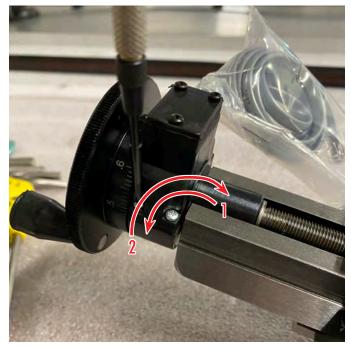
NOTE: The housing is plastic. Do not overtighten the screws or you will strip the threads out of the housing. Just tighten them until they are snug.
